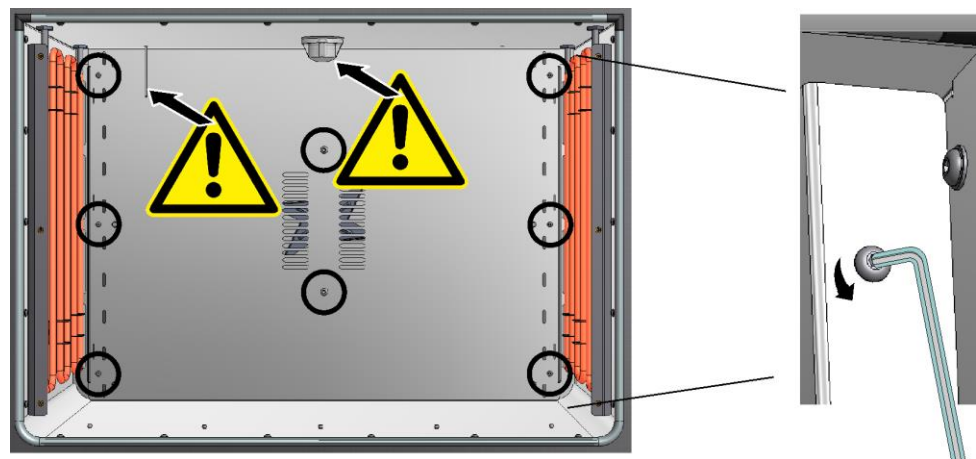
Undoing the screws on the inside back wall (similar to picture)
